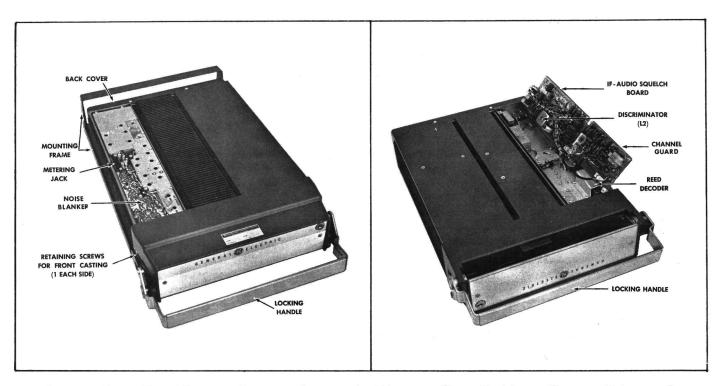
Top Cover Removed Figure 3 - Bottom Cover Removed
